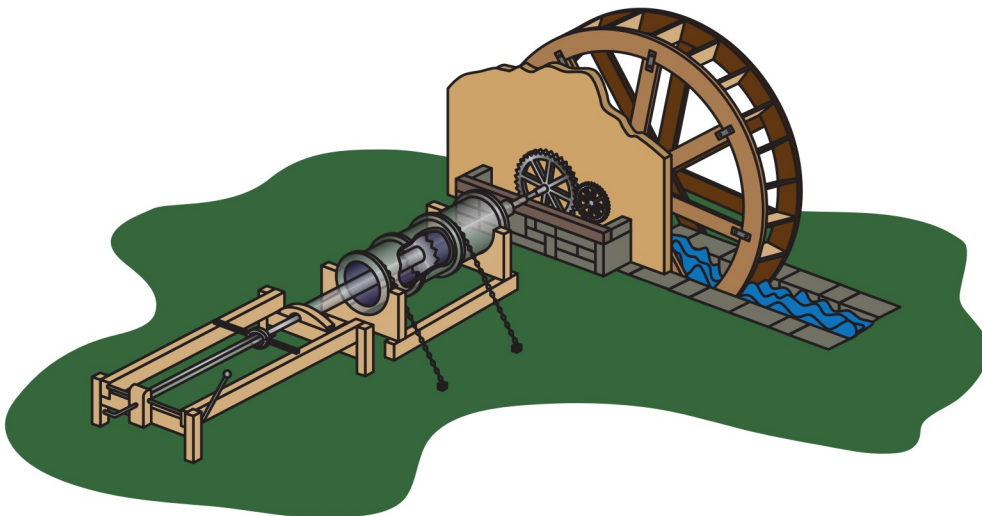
John Wilkinson’s boring machine. It was first used to machine cannon bores, then cylinders for steam engines.
